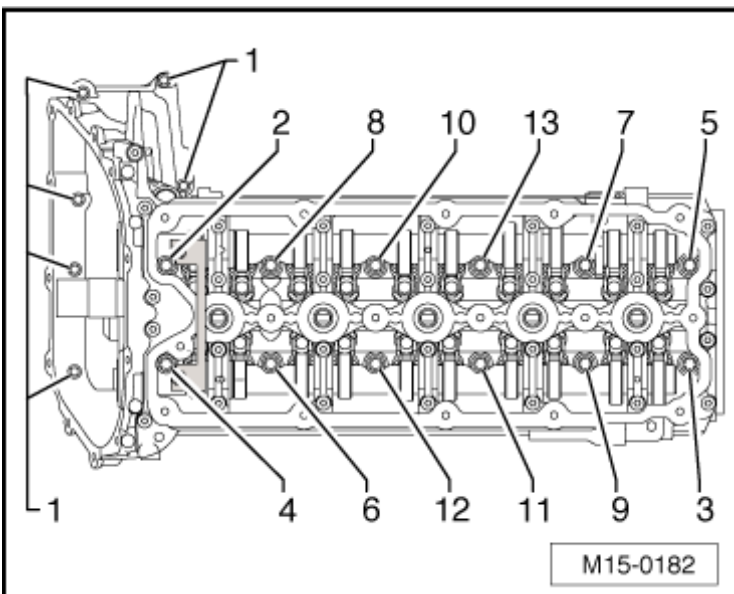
Identifying Cylinder Head Bolts Removed In Sequence Specified
